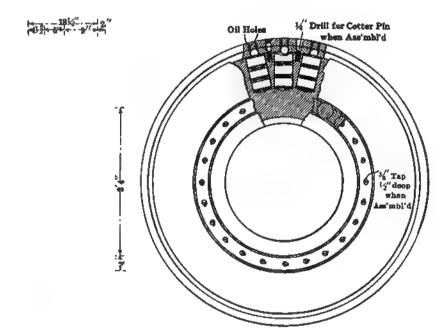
Roller thrust bearing carrying a load of 2,225,000 lbs. at 100 r.p.m.
